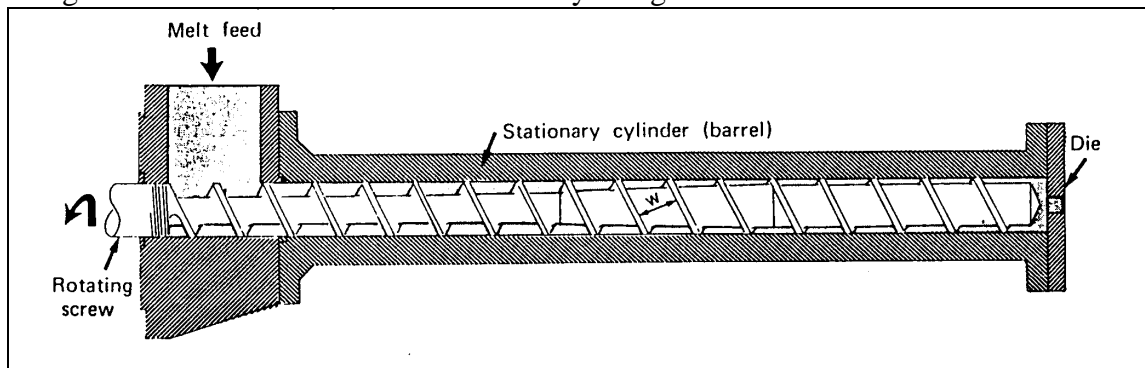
Schematic plan sectional view of a single-screw extruder barrel.
